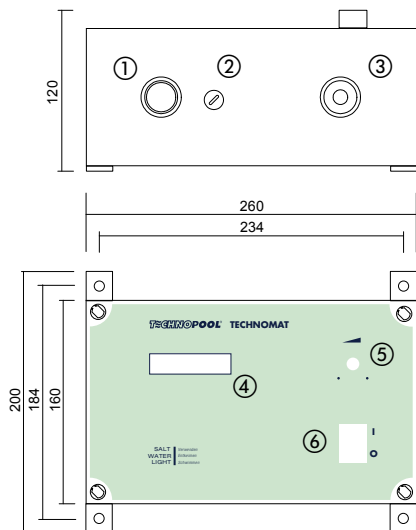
Dimensioned drawing of the control unit (all dimensions in mm)
